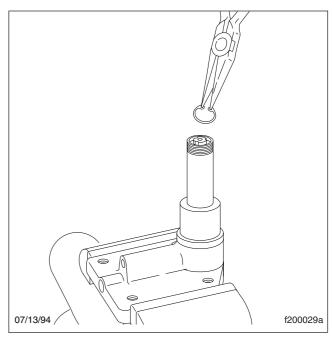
, Retaining Ring Removal and Installation (sheave not shown)
